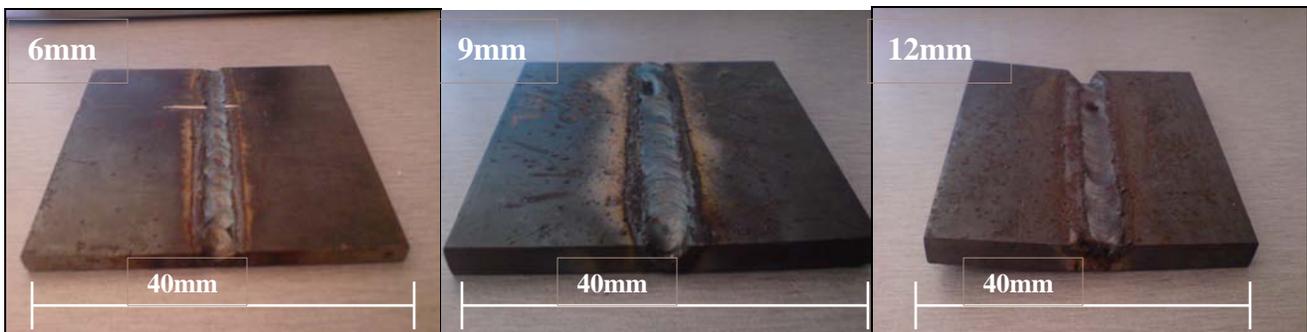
Finished Welding Material for Thickness of 6mm, 9mm and 12mm.
